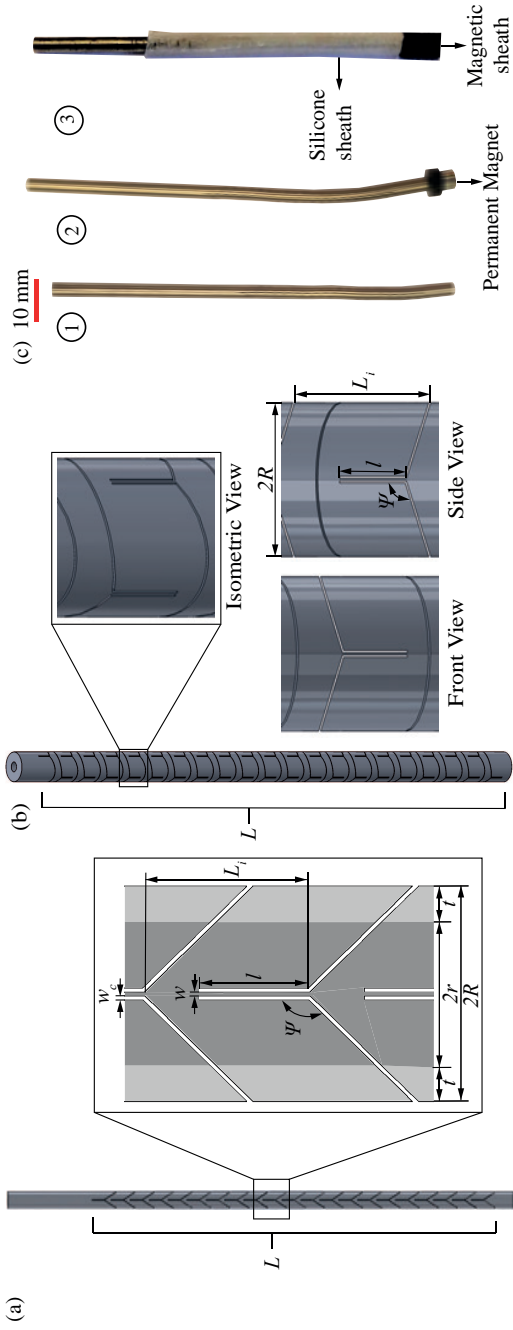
(a) Front view and section view of cross-section of single-axis bending design of manipulator. (b) The isometric, front and side views of two-axis bending design of manipulator. (c) Fabricated Design A of manipulator with permanent magnet at the tip. Design A with silicone sheath and magnetic sheath.
